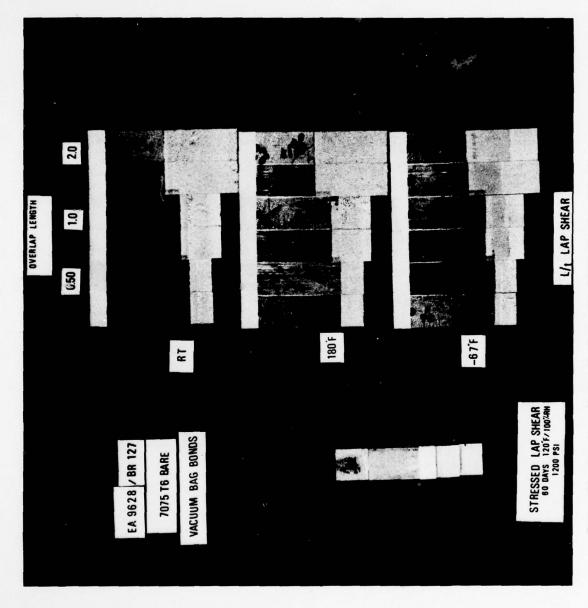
Specimen Failure Surfaces—EA 9628, PasaJell 105, Vacuum Bag Bonds
